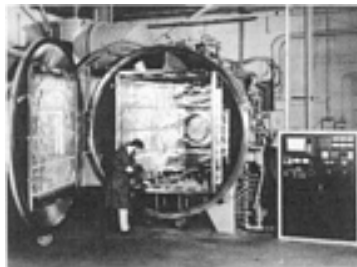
BRAZING FURNACE INSTALLATION SHOWING RELATIVE SIZE OF BRAZING CHAMBER OF THE UNIT TO THE MICROPROCESSOR-BASED CONTROL MODULE. COURTESY OF CENTORR/VACUUM INDUSTRIES
